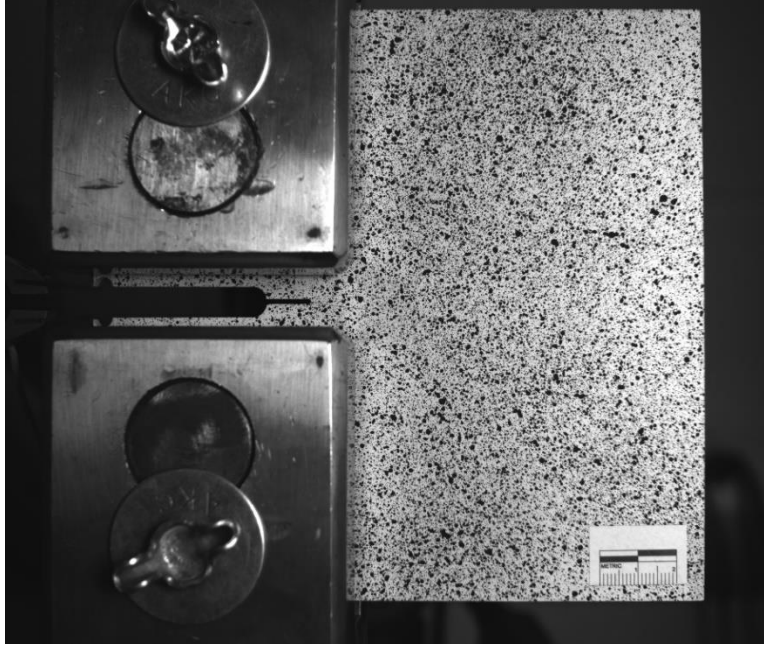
C(T) specimen with 25.4 mm (1.0 in.) in-plane crack under loading case 2.
